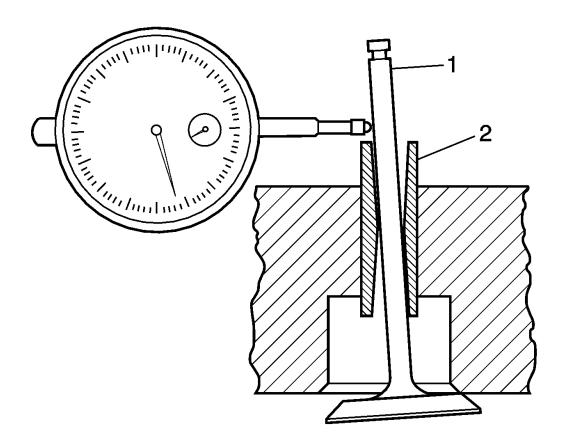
Inspecting For Excessive Valve Stem To Guide Clearance Courtesy of GENERAL MOTORS CORP.
